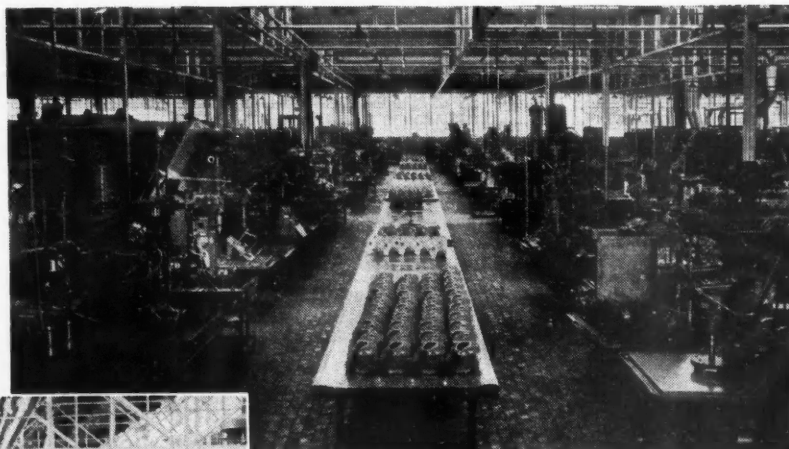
(Above) Department for machining aluminum cylinder-head castings. Approximately 50 different types of cylinder heads are manufactured on this line. The arrangement is typical of the equipment layout for machining other parts, the straight-line production scheme being used only for manufacture of separate units, and related groups of units.
